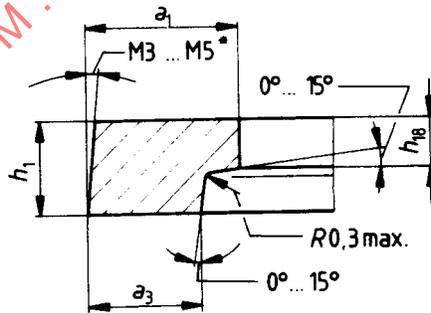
INTERNAL STEP BOTTOM SIDE (IWU)
